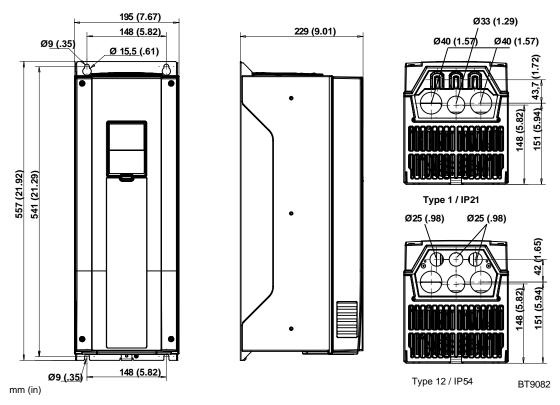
Siemens Drive Dimensions, FS6, Wall-Mount.
